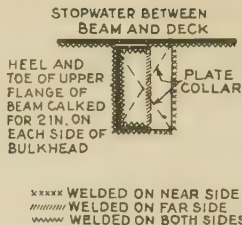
Typical plate collar around beam piercing welded bulkhead.
